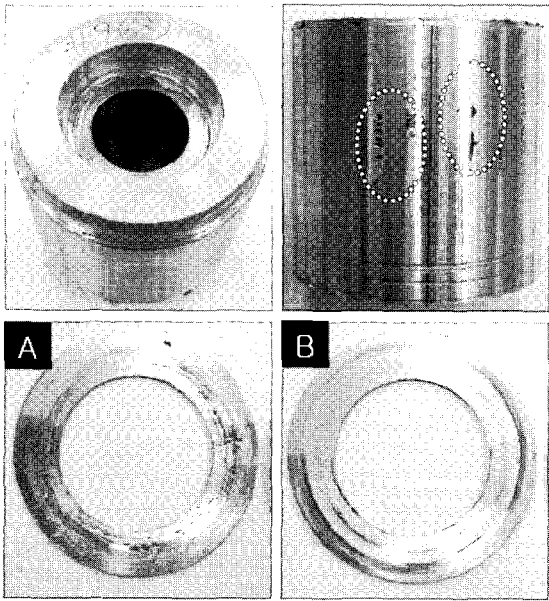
Filling defects of thixoformed Cu-rotor (A) upper end ring (B) lower end ring
